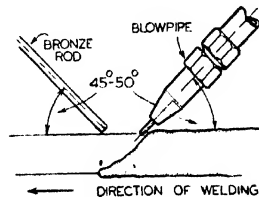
ANGLES OF BLOWPIPE AND ROD AND DIRECTION OF WELDING
